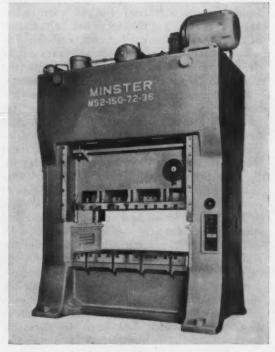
Minster 150-ton, double-geared, twin-drive press
